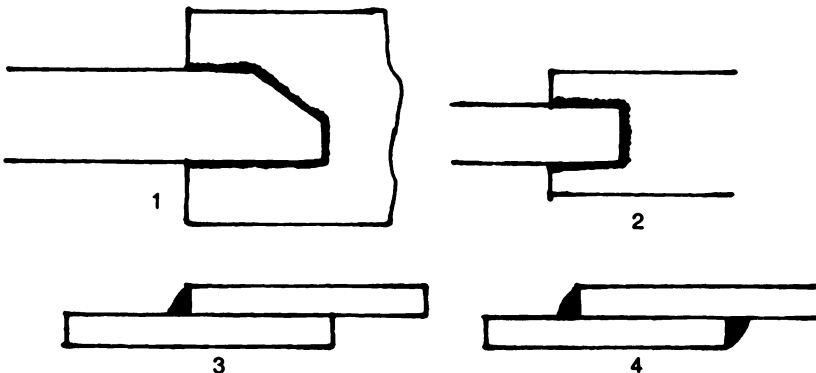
Fillet welding: 1. Sides, diagonal and end weld, 2. Return weld (sides and end weld), 3. Single lap weld, 4. Double lap weld. (The overlaps as a rule should not be less than five times the thickness of the thinner part.)
